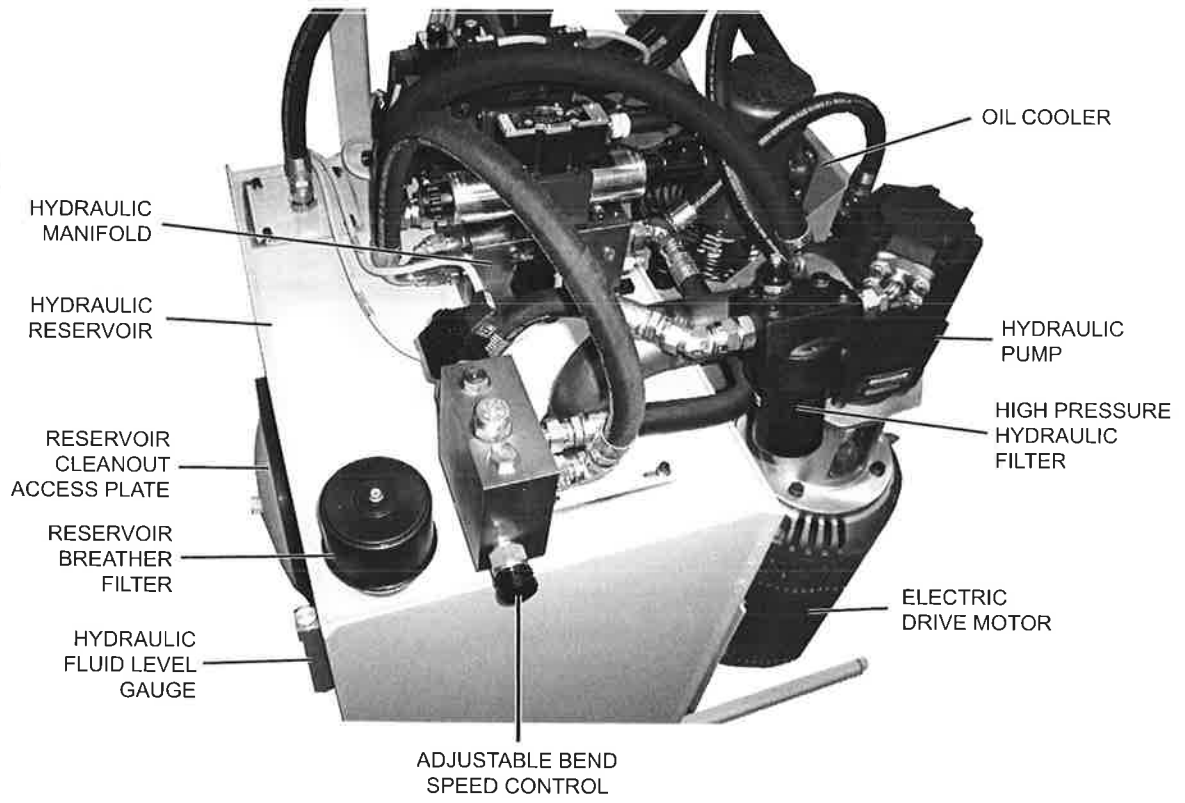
Hydraulic System (Models 175 Ton to Standard 320 Ton)
